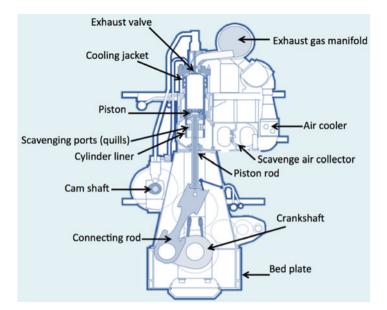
Schematic illustration of a slow-speed (<250 RPM) crosshead diesel engine
